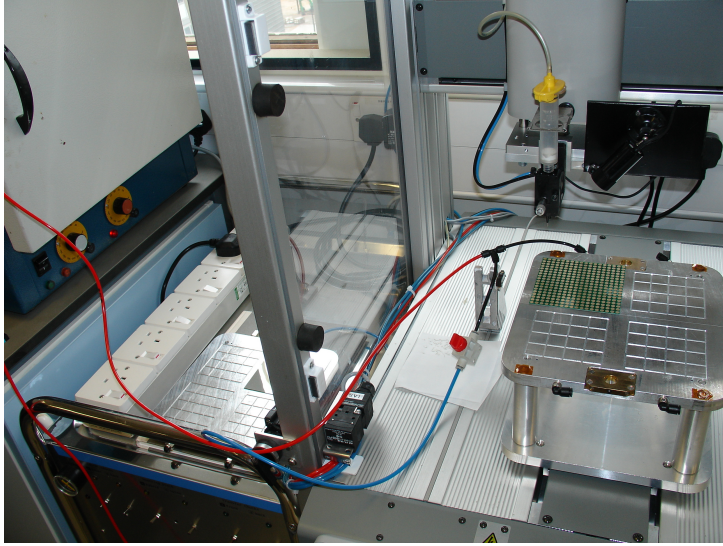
Vacuum jigs installed in the gluing enclosure. Also shown is a test PCB with the correct pad layout for the production silicon wafers.
